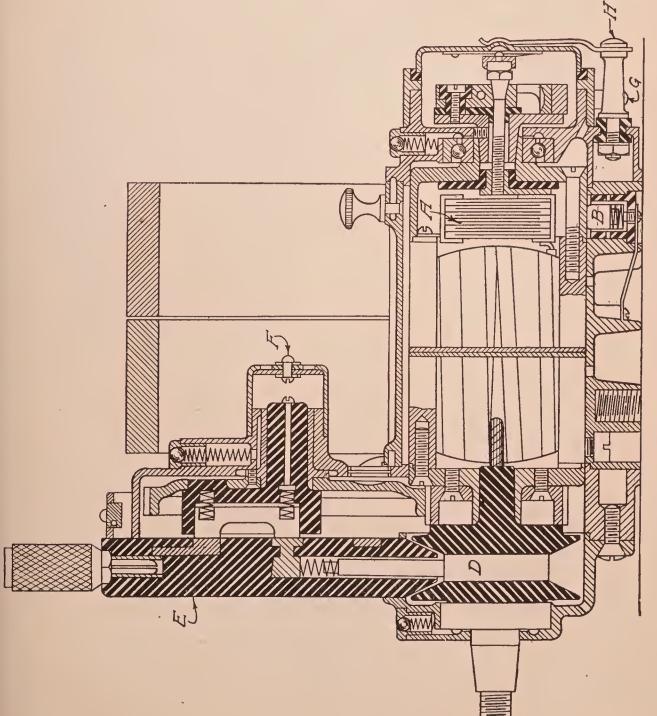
Sectional and End Views Through High-Tension Magneto (Horseless Age)
